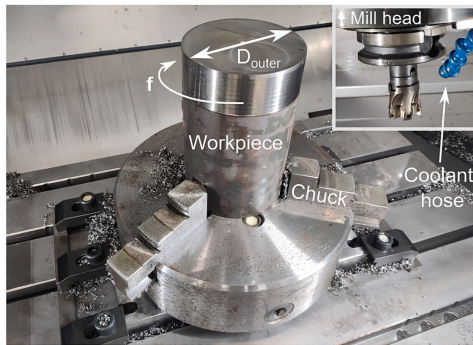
Setup of workpiece in the mill and description of external circular down milling.
